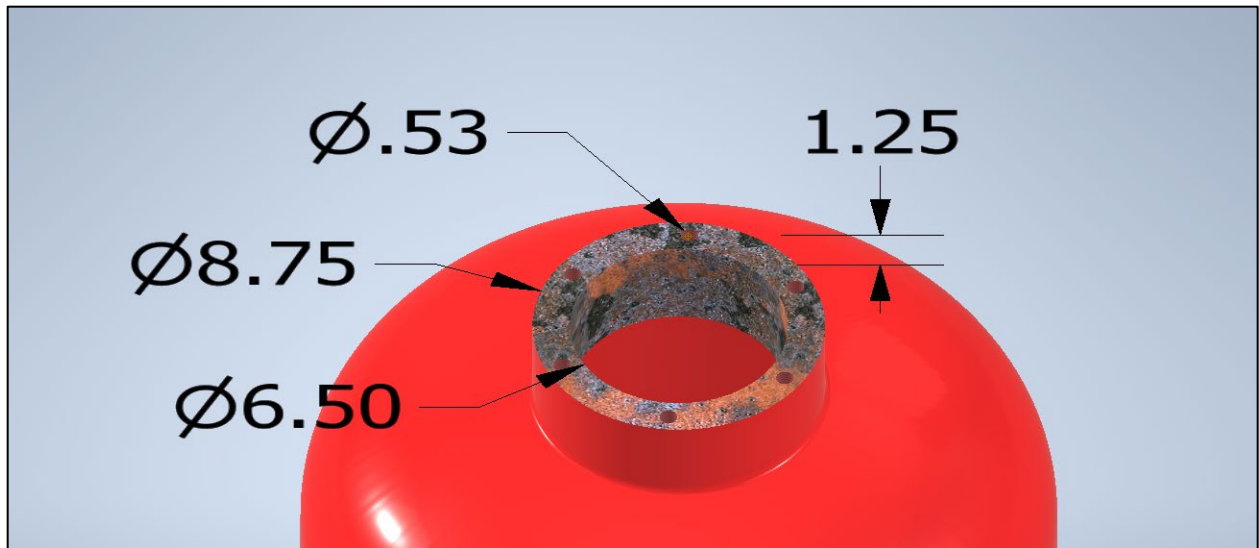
Drawing. Detail of the top of the tank; measurements in inches.
